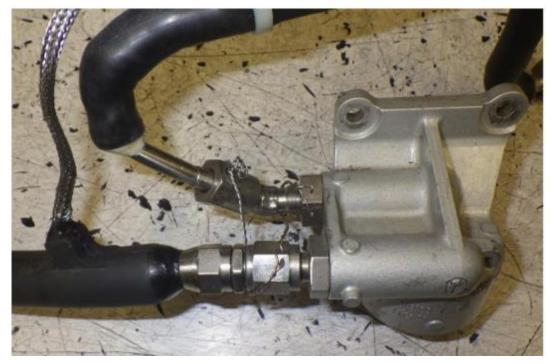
Loose B-nuts that were removed from the engine. (Source: Technical report from the engine manufacturer)
